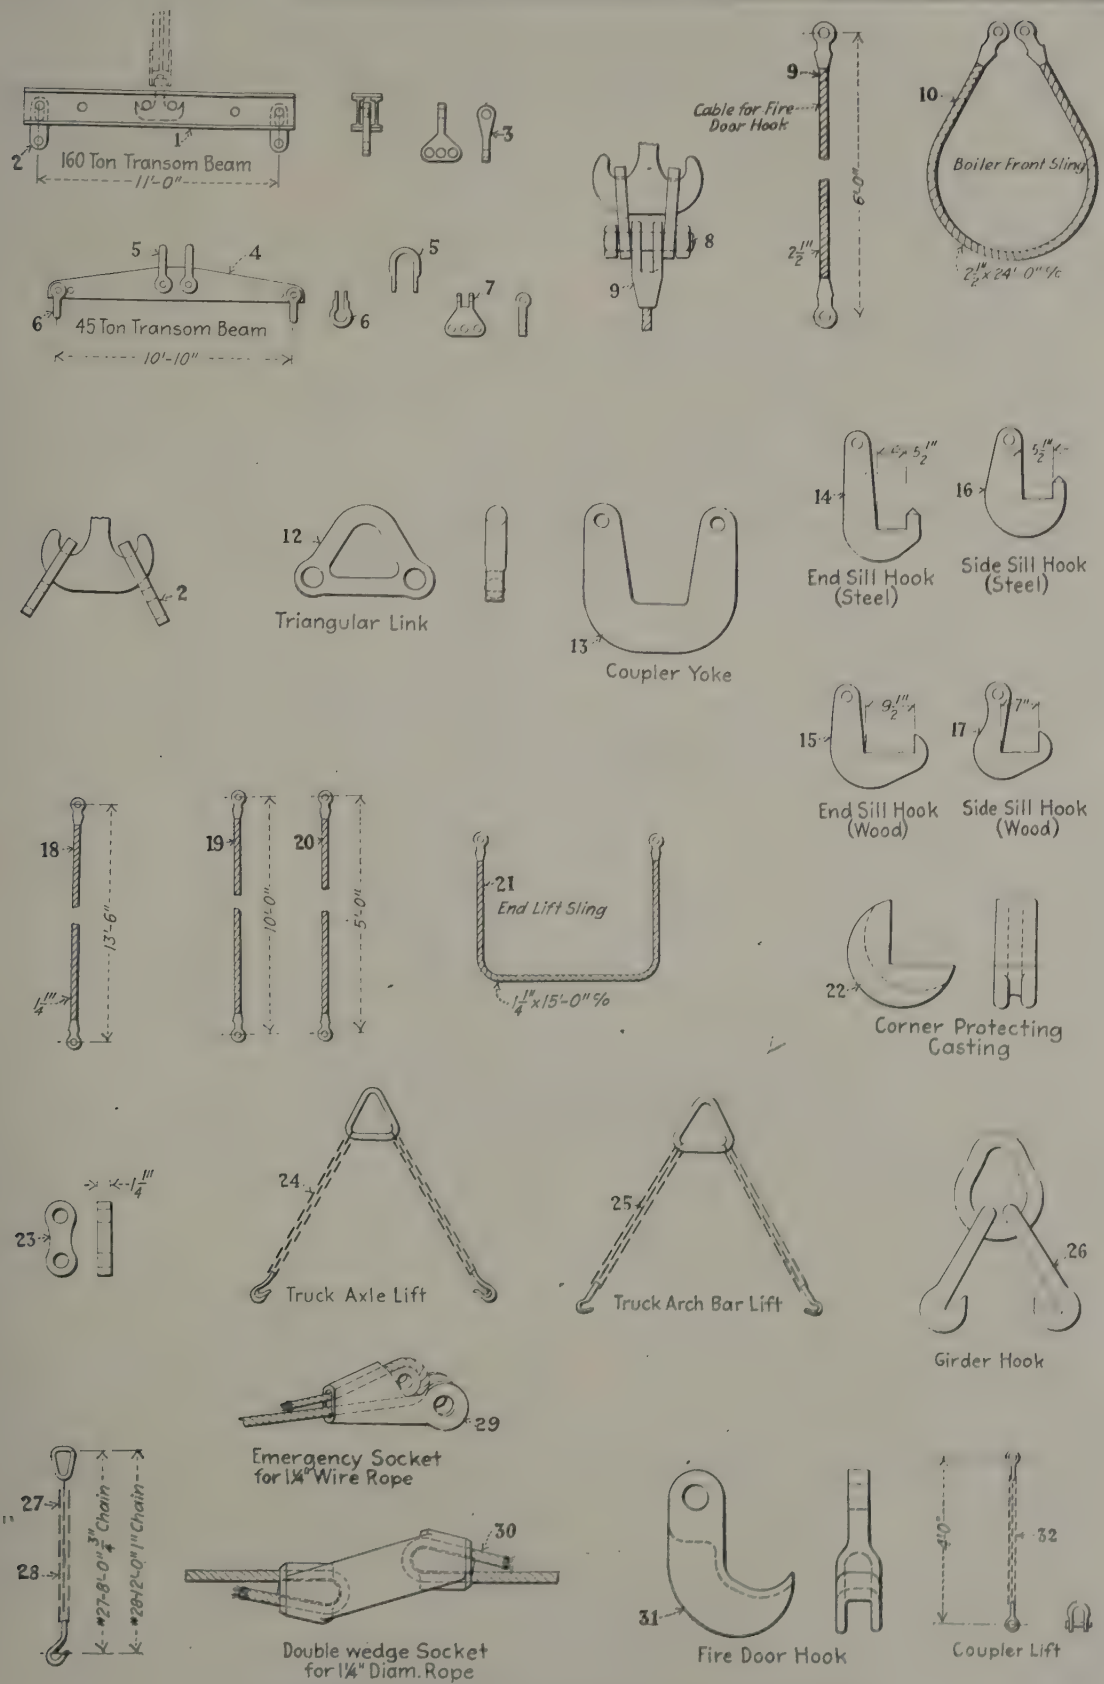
Wrecking Crane Equipment. Bucyrus Company.
